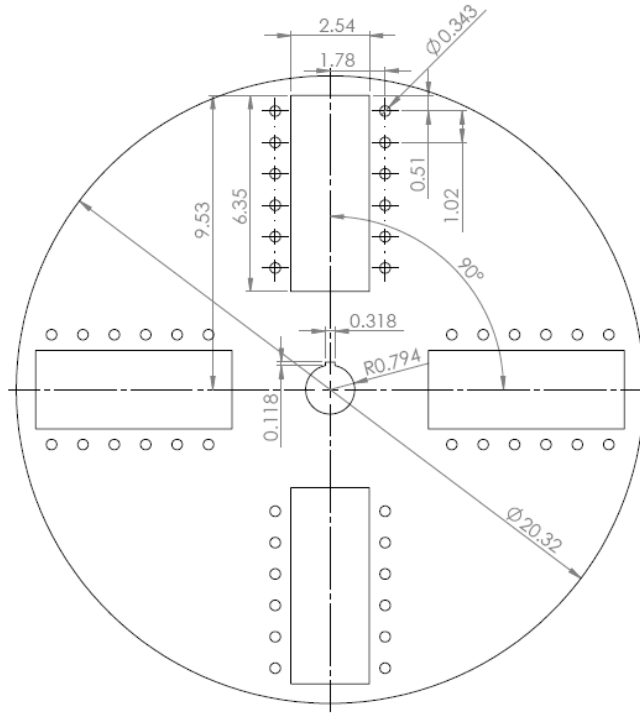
A 2D drawing of rotary disc target holder with dimensions in cm.
